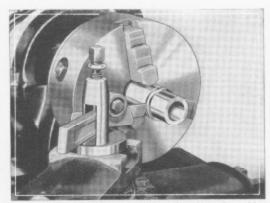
Cutting Off a Bushing that Has Been Machined Complete Without Removing from the Chuck
